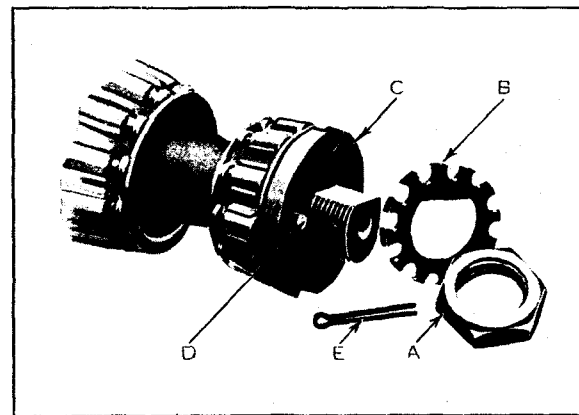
Front Wheel Bearings and Adjusting Nuts.
